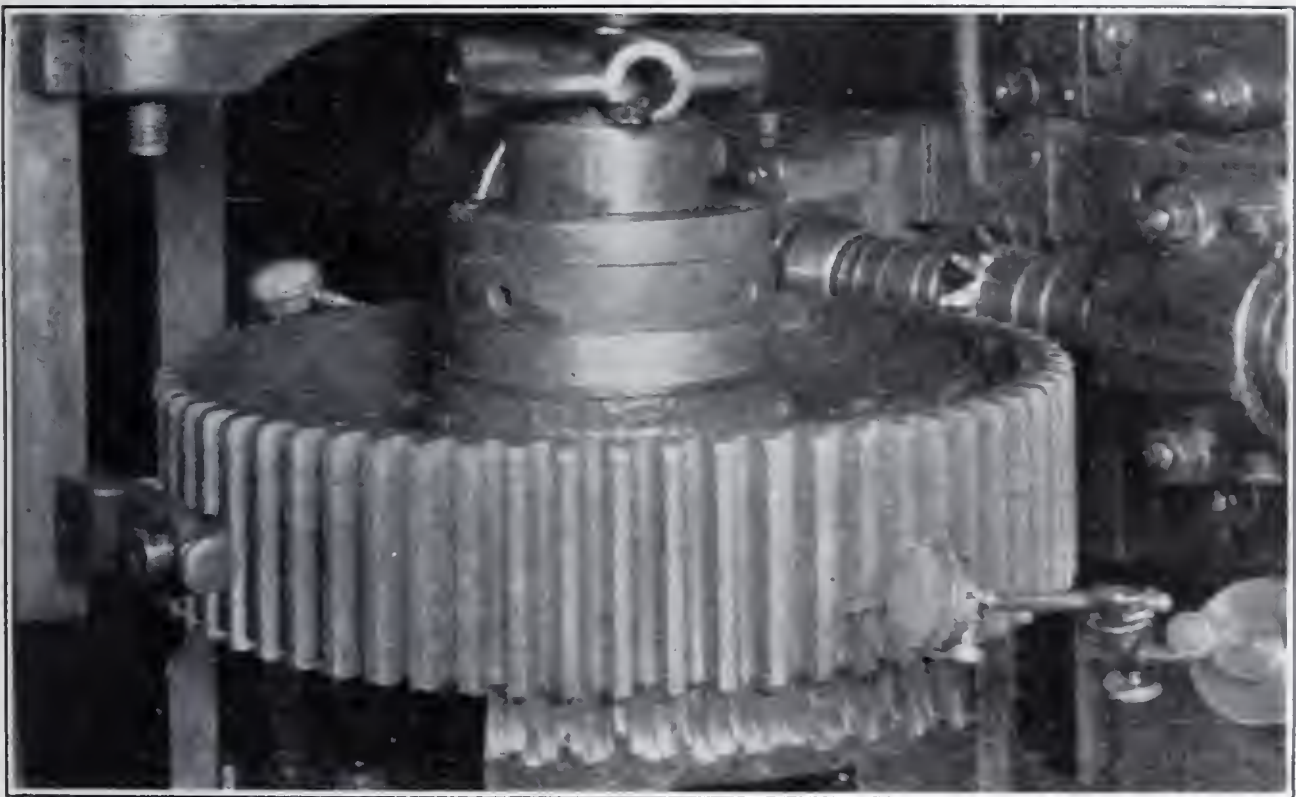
Device for Testing Accuracy of Hobbing Machine.
